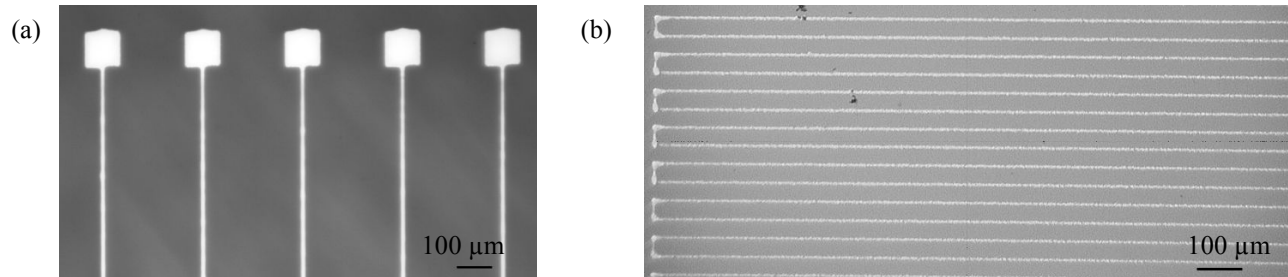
Printed electronic components: (a) printed metal pads and interconnects (b) an inductor pattern.
